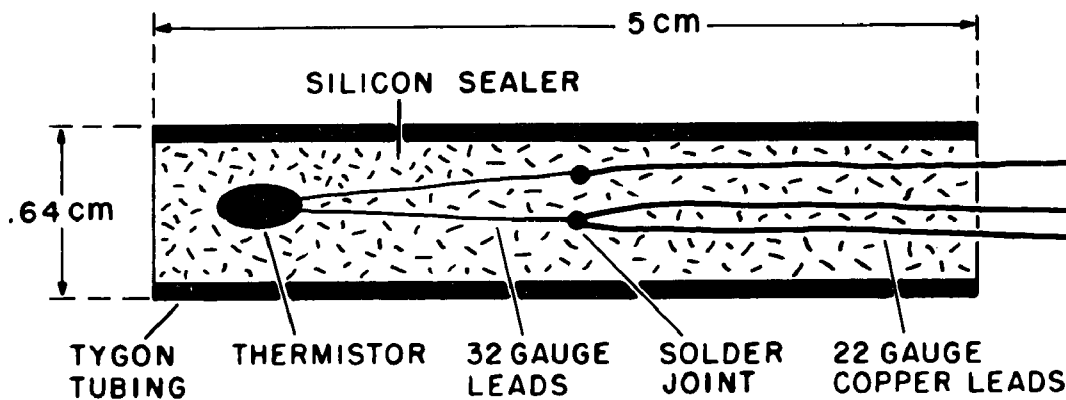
Potted thermistor assembly showing the details of the thermistor mounts.
